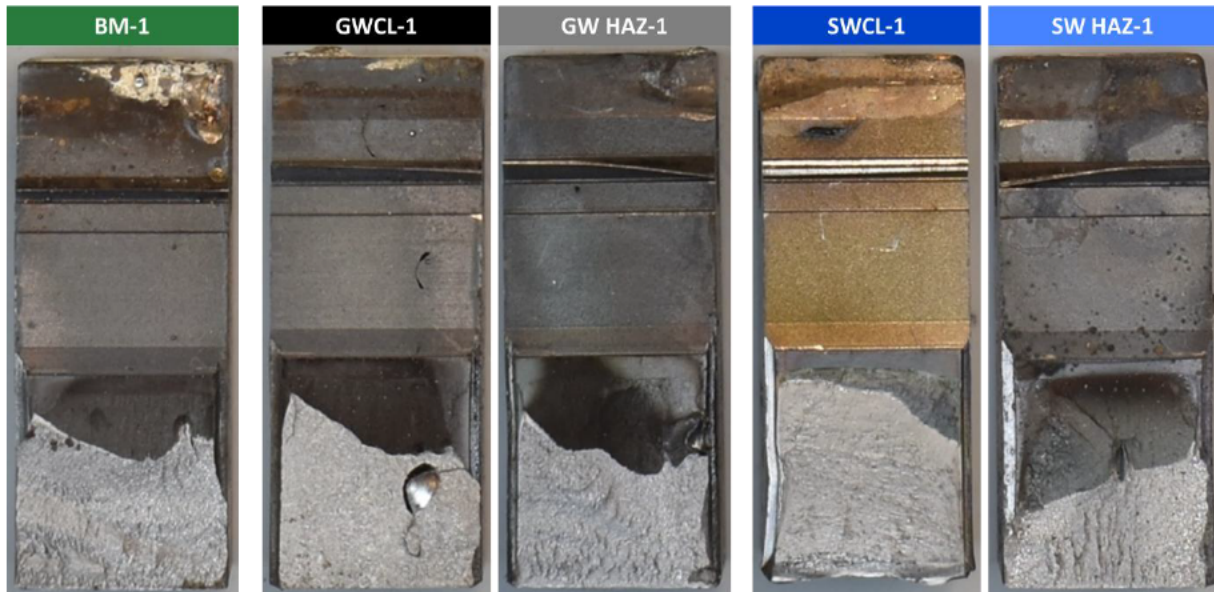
Post test fracture surfaces of base metal, GWHAZ and SWHAZ specimens from X80.
